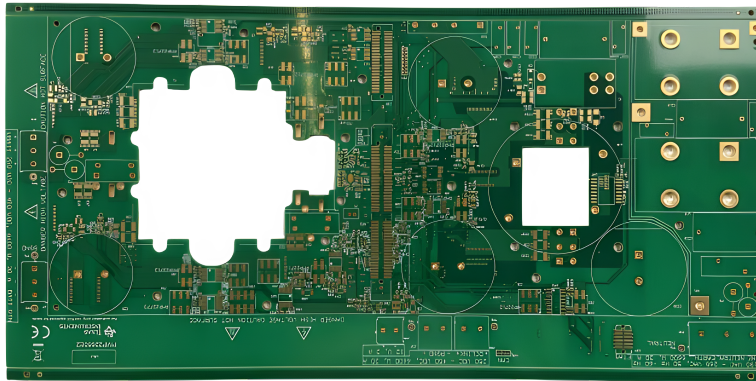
Manufactured PCB prototype prior to through-hole component assembly
